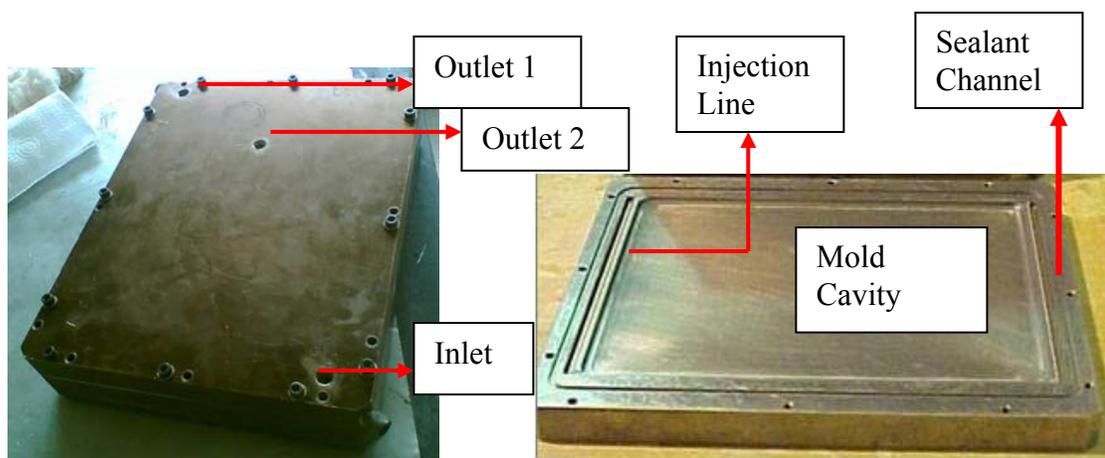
The two piece steel flat mold used (a) closed mold, (b) open lower mold
